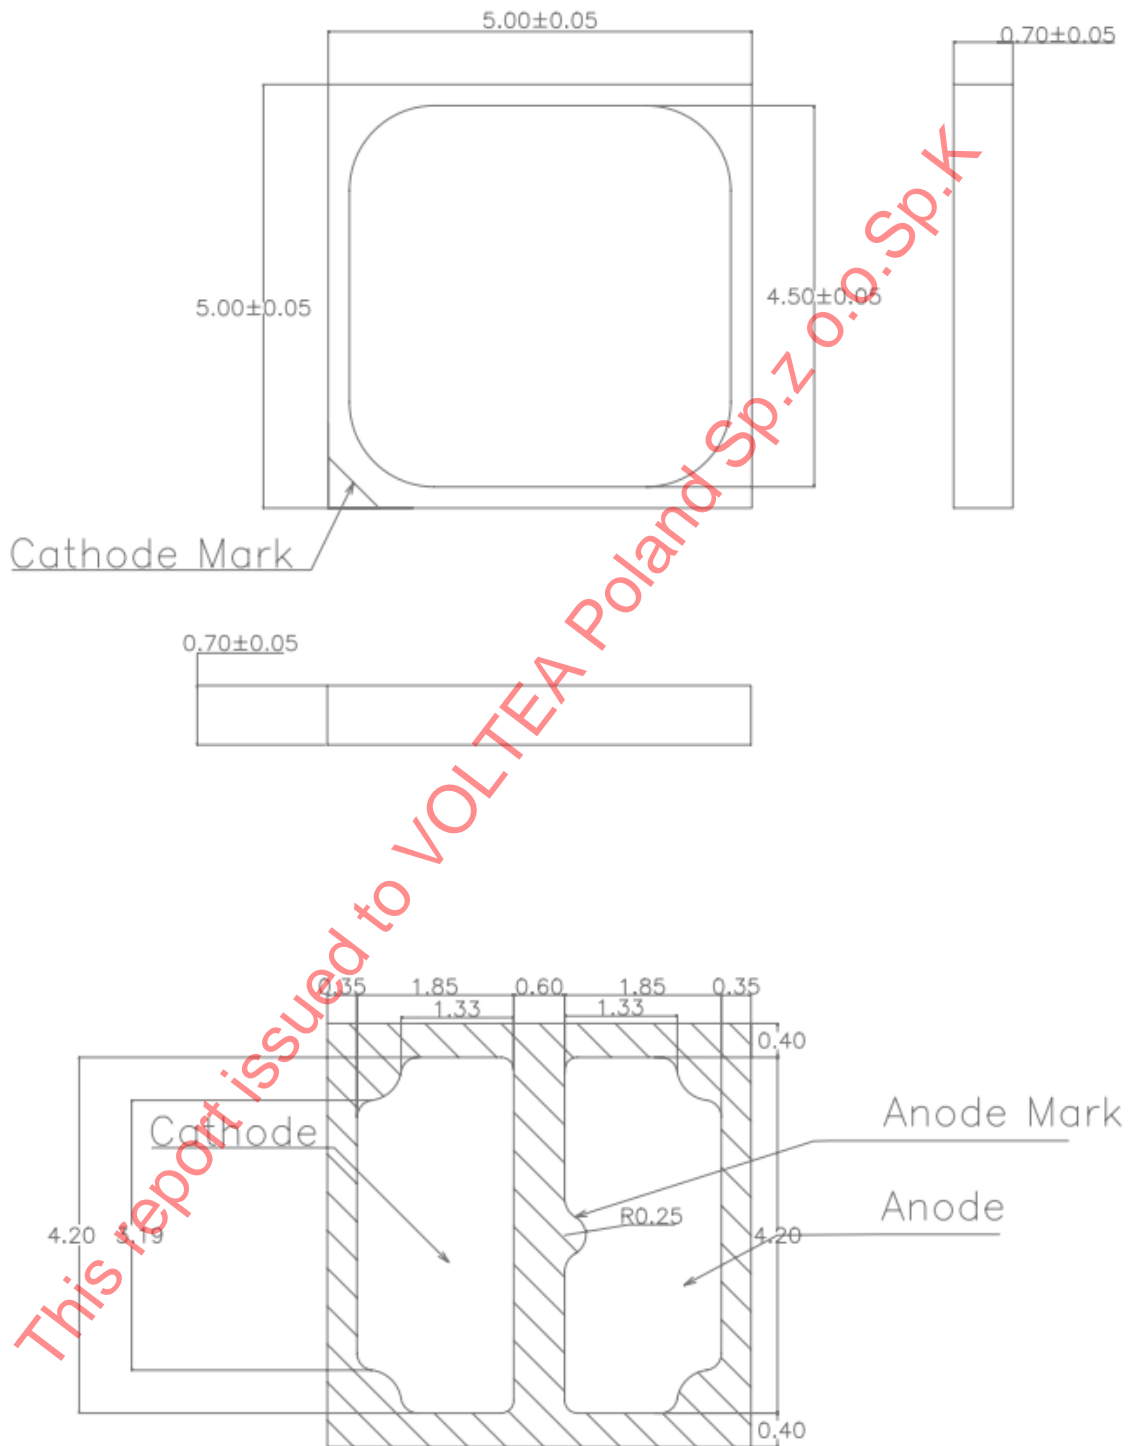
Mechanical drawings for the LUXEON 5050 Square LES (all dimensions in millimeters).
